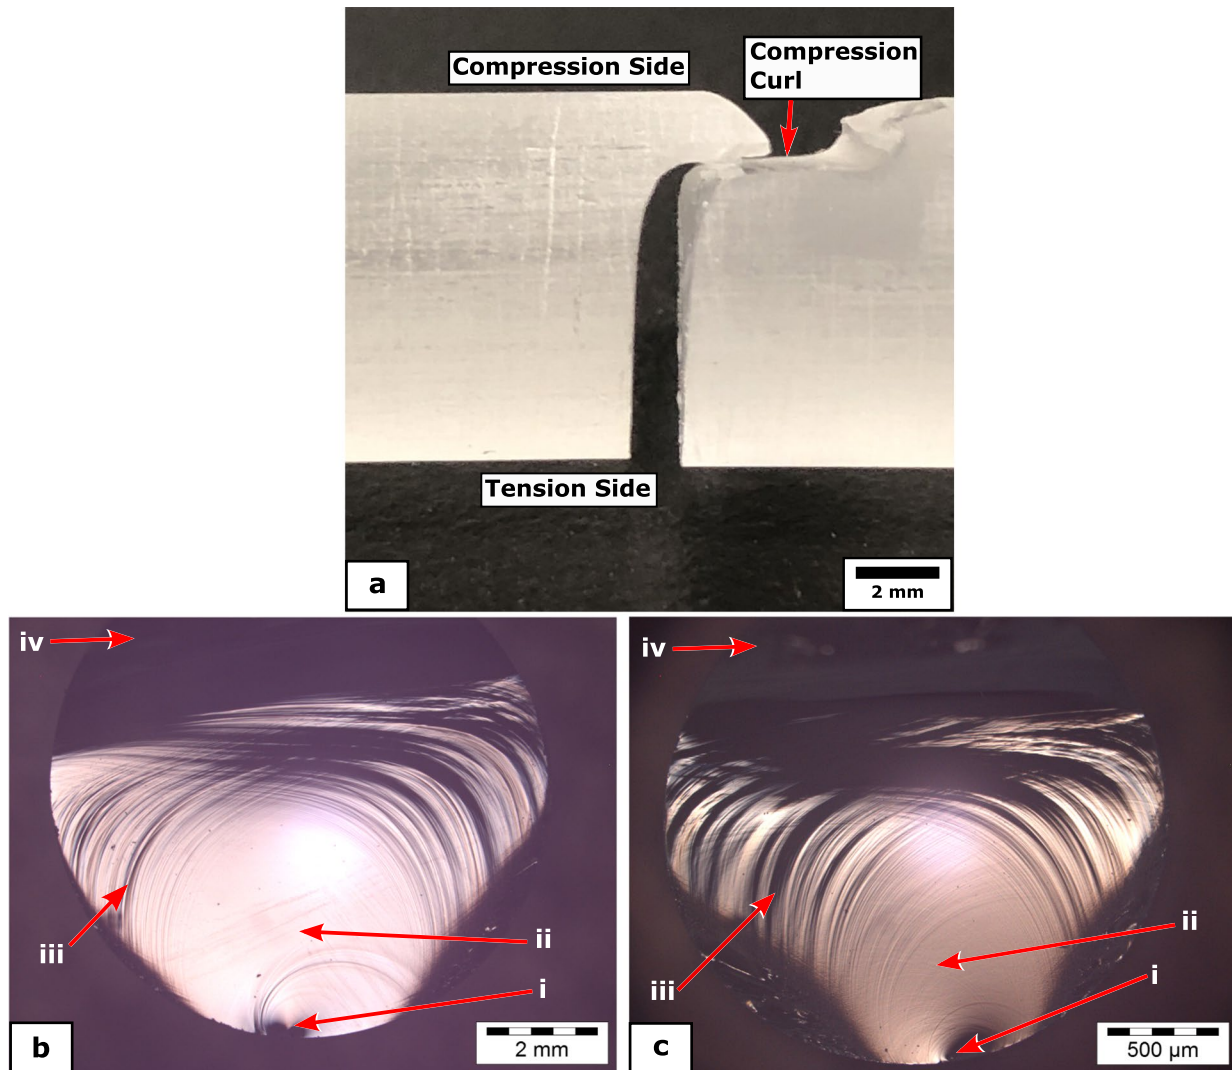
Representative fracture profiles for borosilicate glass rods following four-point bending. (a) Fracture path showing compression curl. (b-c) Failure surfaces showing (i) fracture origin, (ii) fracture mirror, (iii) Wallner lines, and (iv) compression curl for (b) untreated and (c) 400-grit specimen
